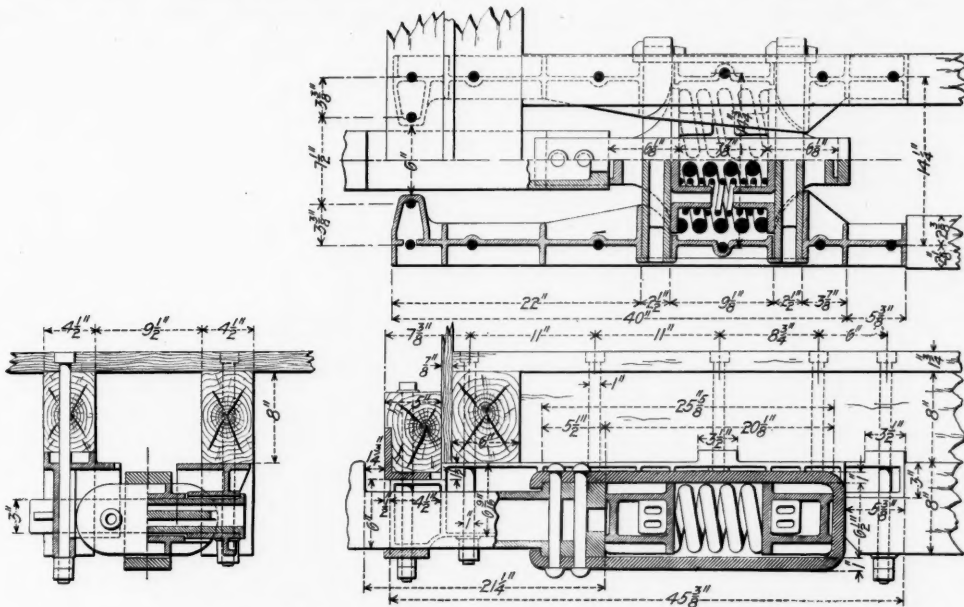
The Dayton Twin-Spring Draft Gear—Wood Center Sills.
